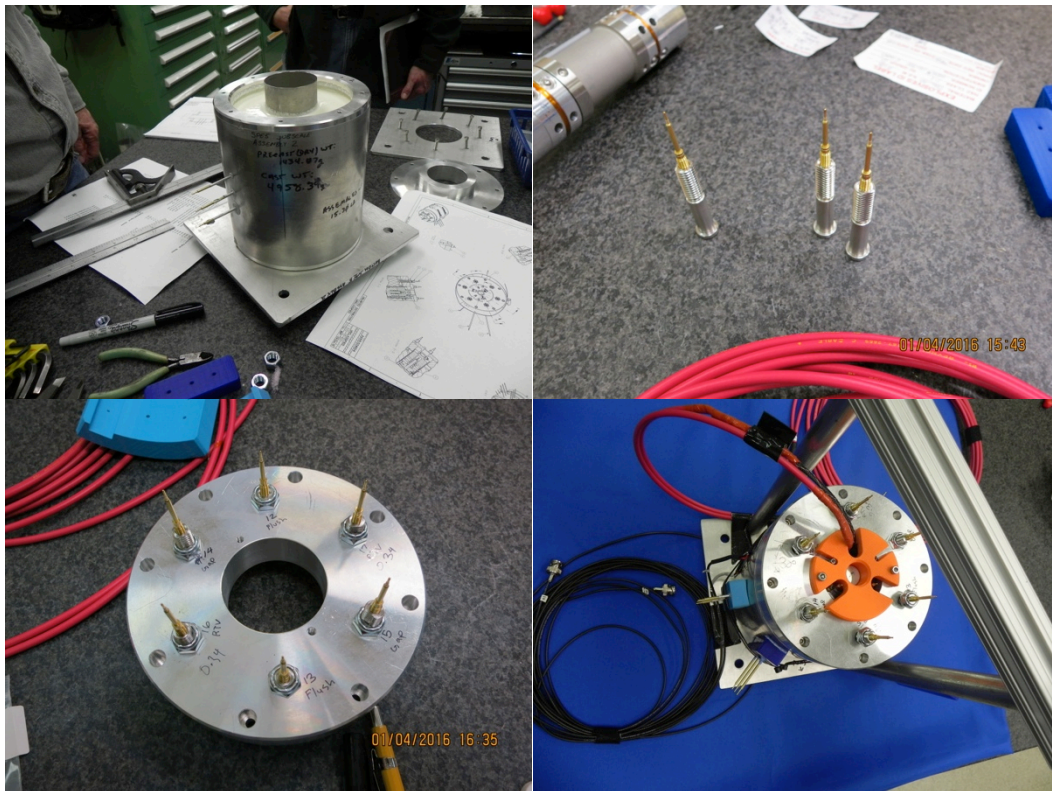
Photographs detailing the canister filled getting ready for final assembly (upper left), piezoelectric crystal pins in pin-plunger assembly (upper right), top plate assembly with pins installed (lower left), and completed assembly with booster inserted.
